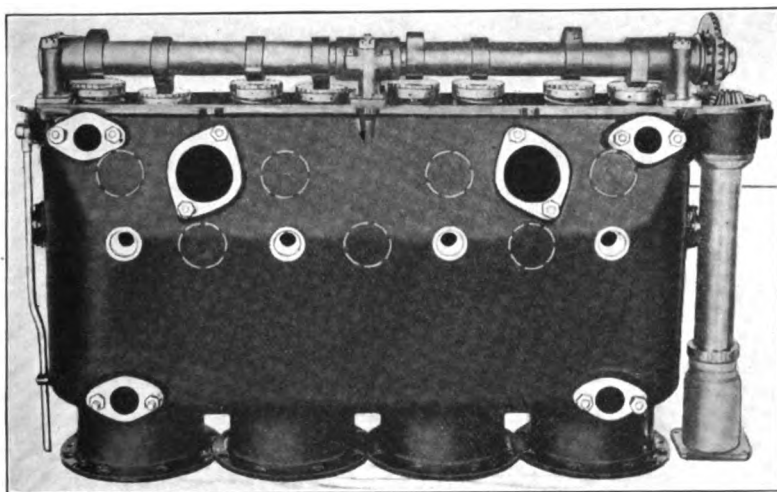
View of one bank with camshaft in position, models A, I and E.
